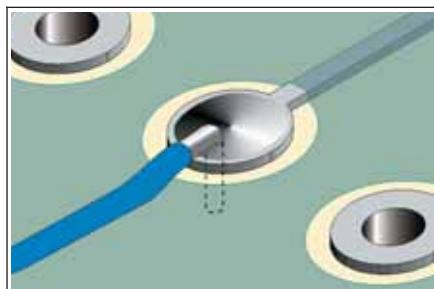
Not recommended Wire soldered parallel or perpendicular to component.
